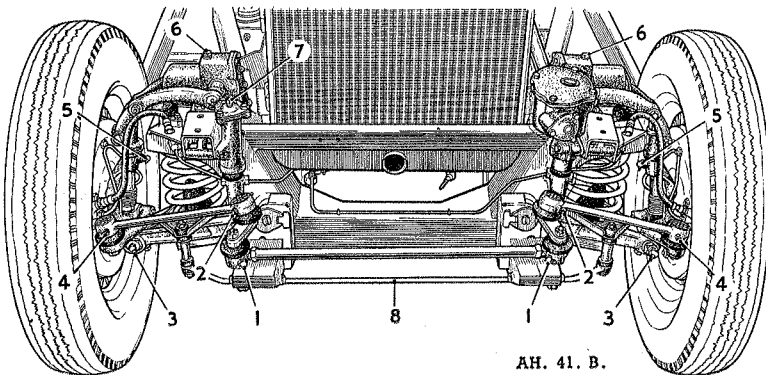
Showing the front suspension, steering layout and lubrication points.
